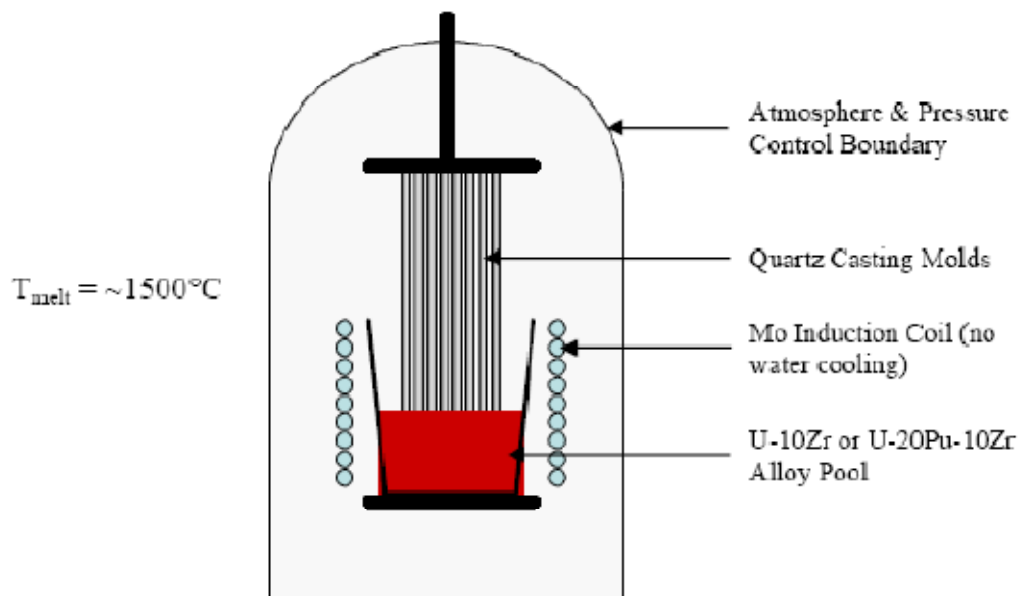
Schematic of injection casting system used for U-Zr fuel [3].
